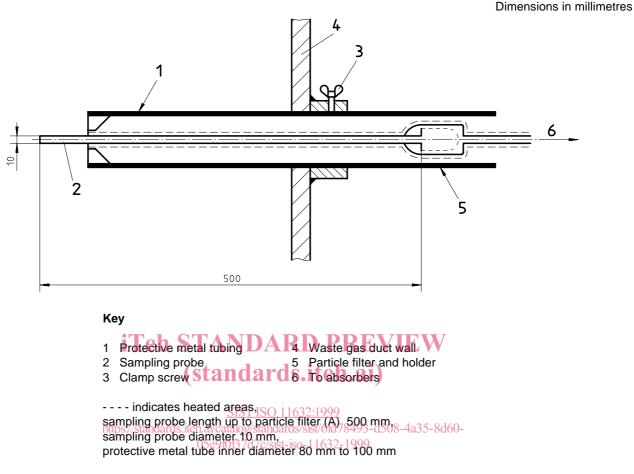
Positioning of sampling probe, filter holder and protective tube
